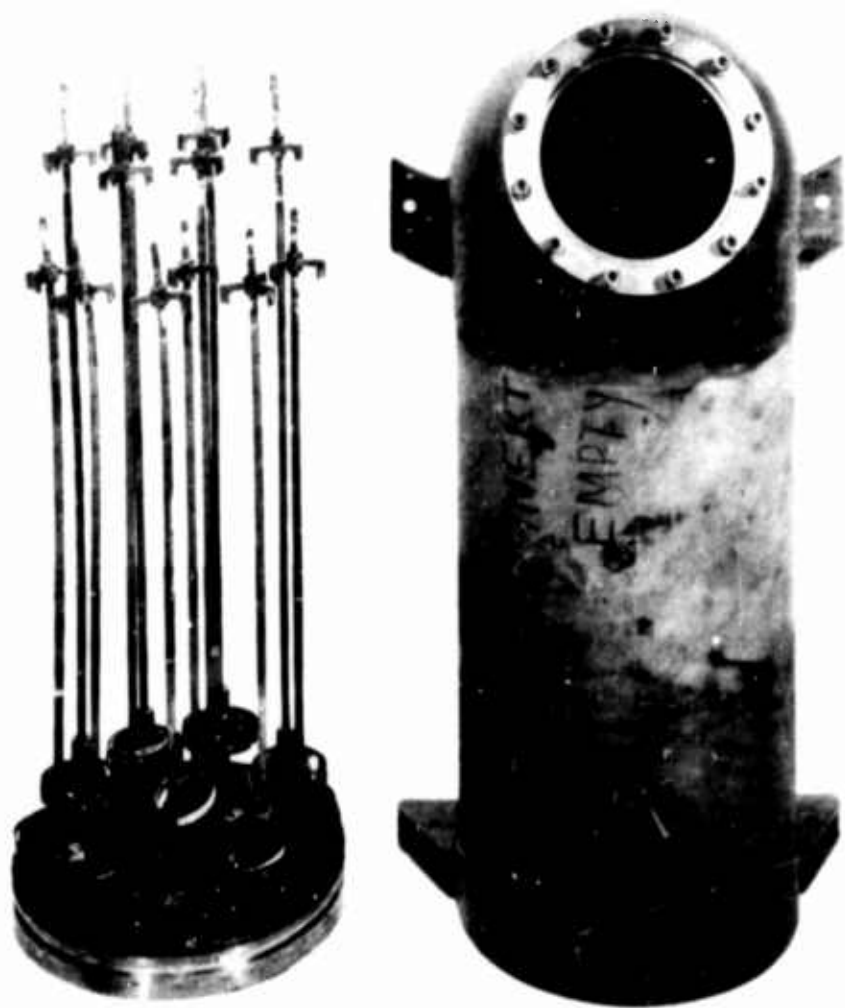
Head End and Suspension Assembly with Case, XM15 Escape Rocket, After Firing
